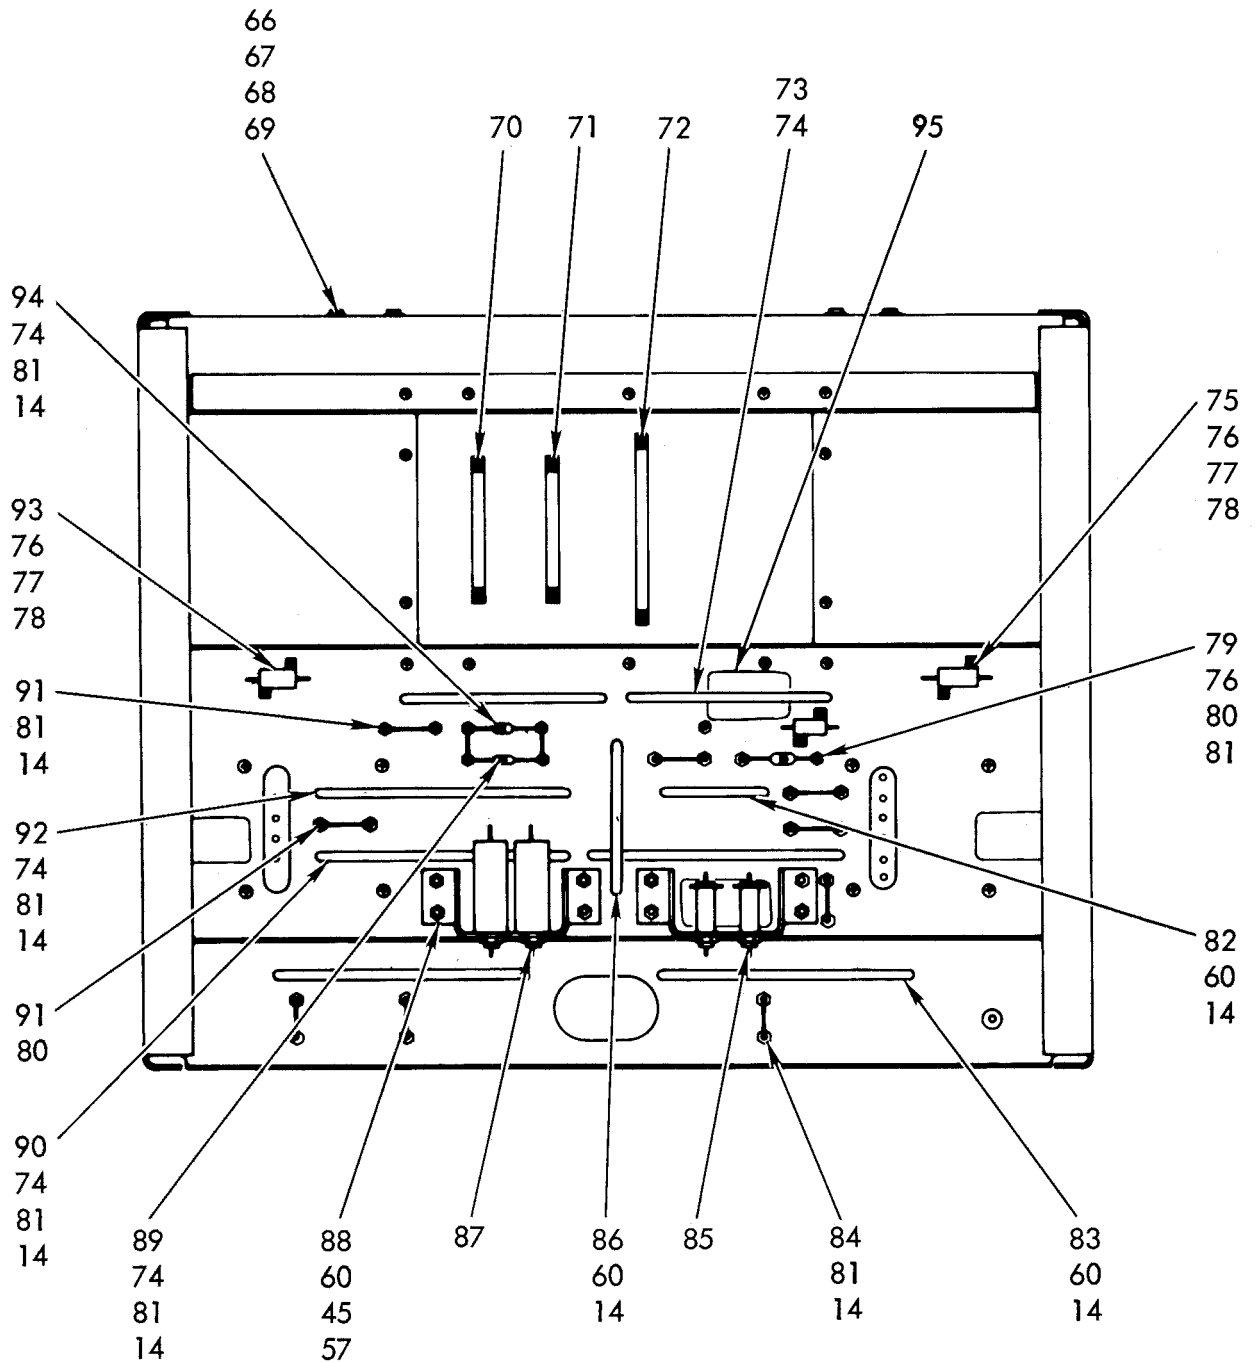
Panel/Chassis Assembly - Wired, 012-301020-01 (Sheet 6 of 8)
